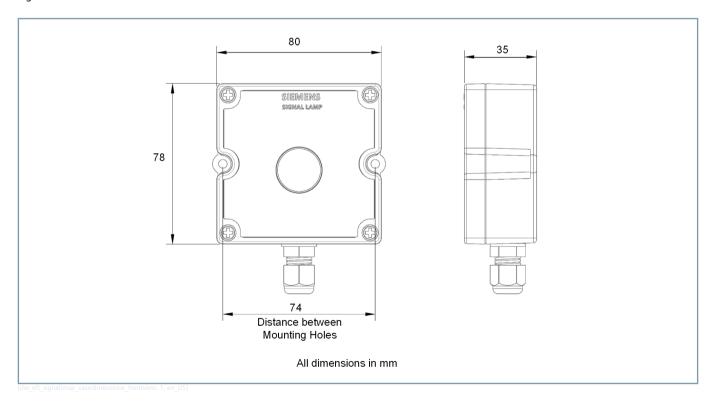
/2 Siemens Signal Lamp Front and Side View
